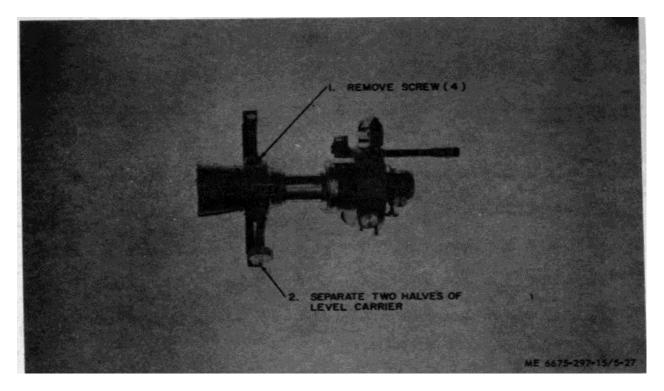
Horrebow-Talcott level carrier, removal and installation.
